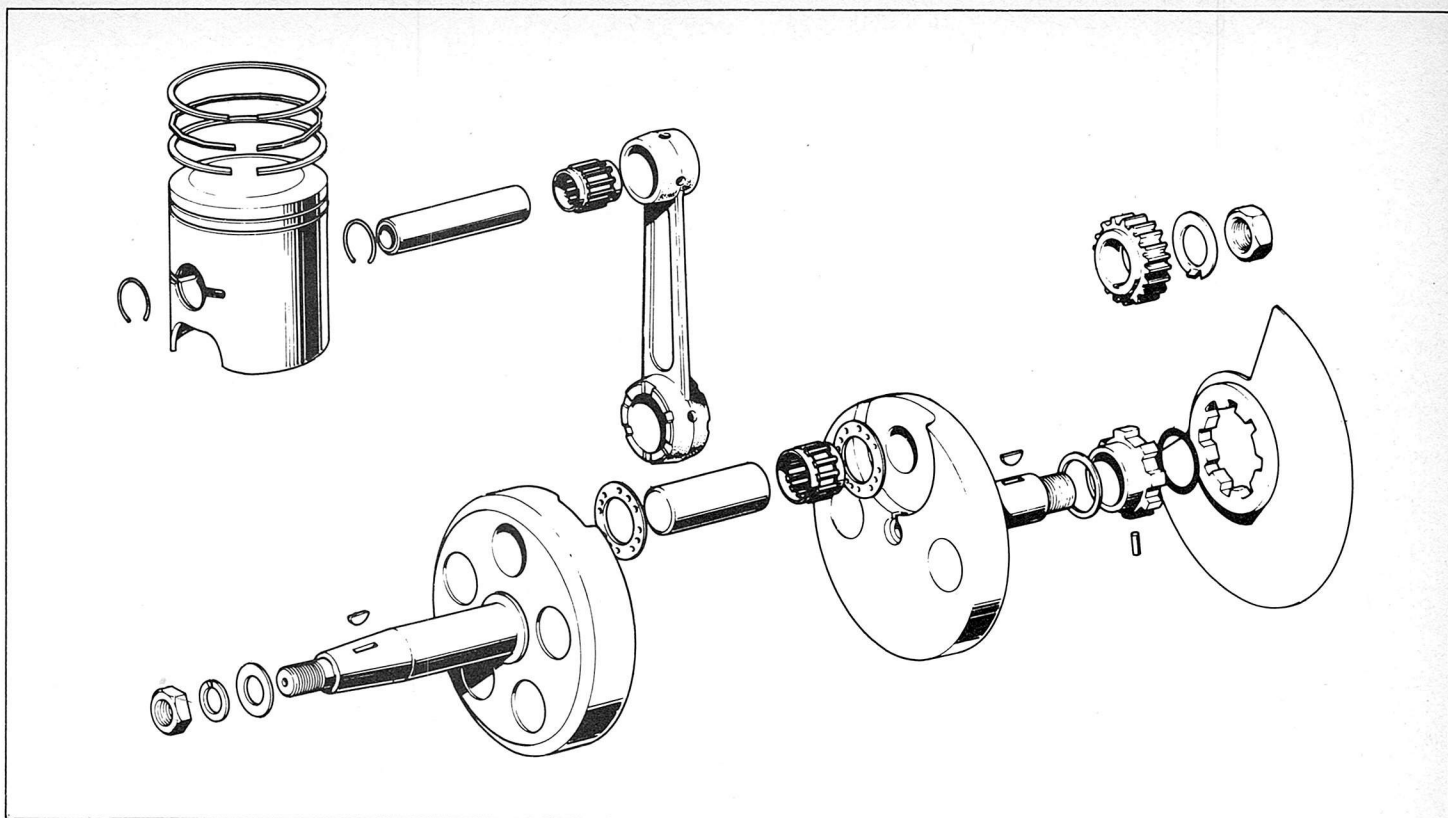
Exploded view of engine, courtesy of Kawasaki, shows rotary valve attachment to end of crankshaft. Rotary valve is outside of the crankcase. When cut-out portion of rotary valve passes by a hole in the crankcase (not shown), mixture can be drawn into case. Thus inlet timing is achieved by the leading and trailing edges of the wedge in the rotary valve. Timing does not have to be symmetrical, which is an engineering advantage over a conventional piston-controlled engine.
